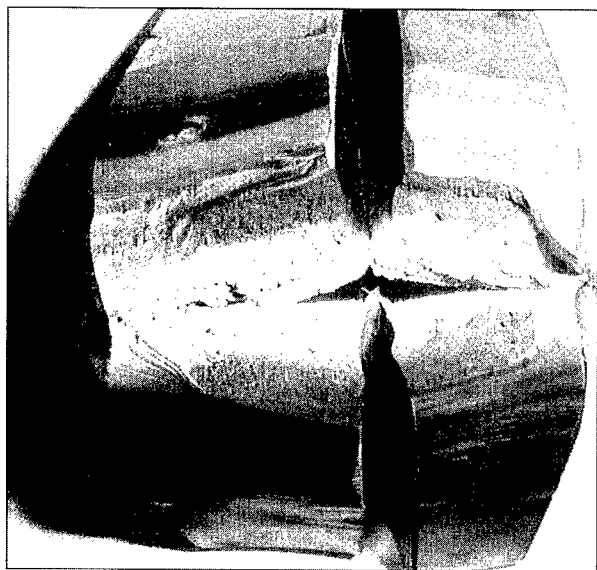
Appearance of fracture surface of the circumferential weld in D_n 300 piping
